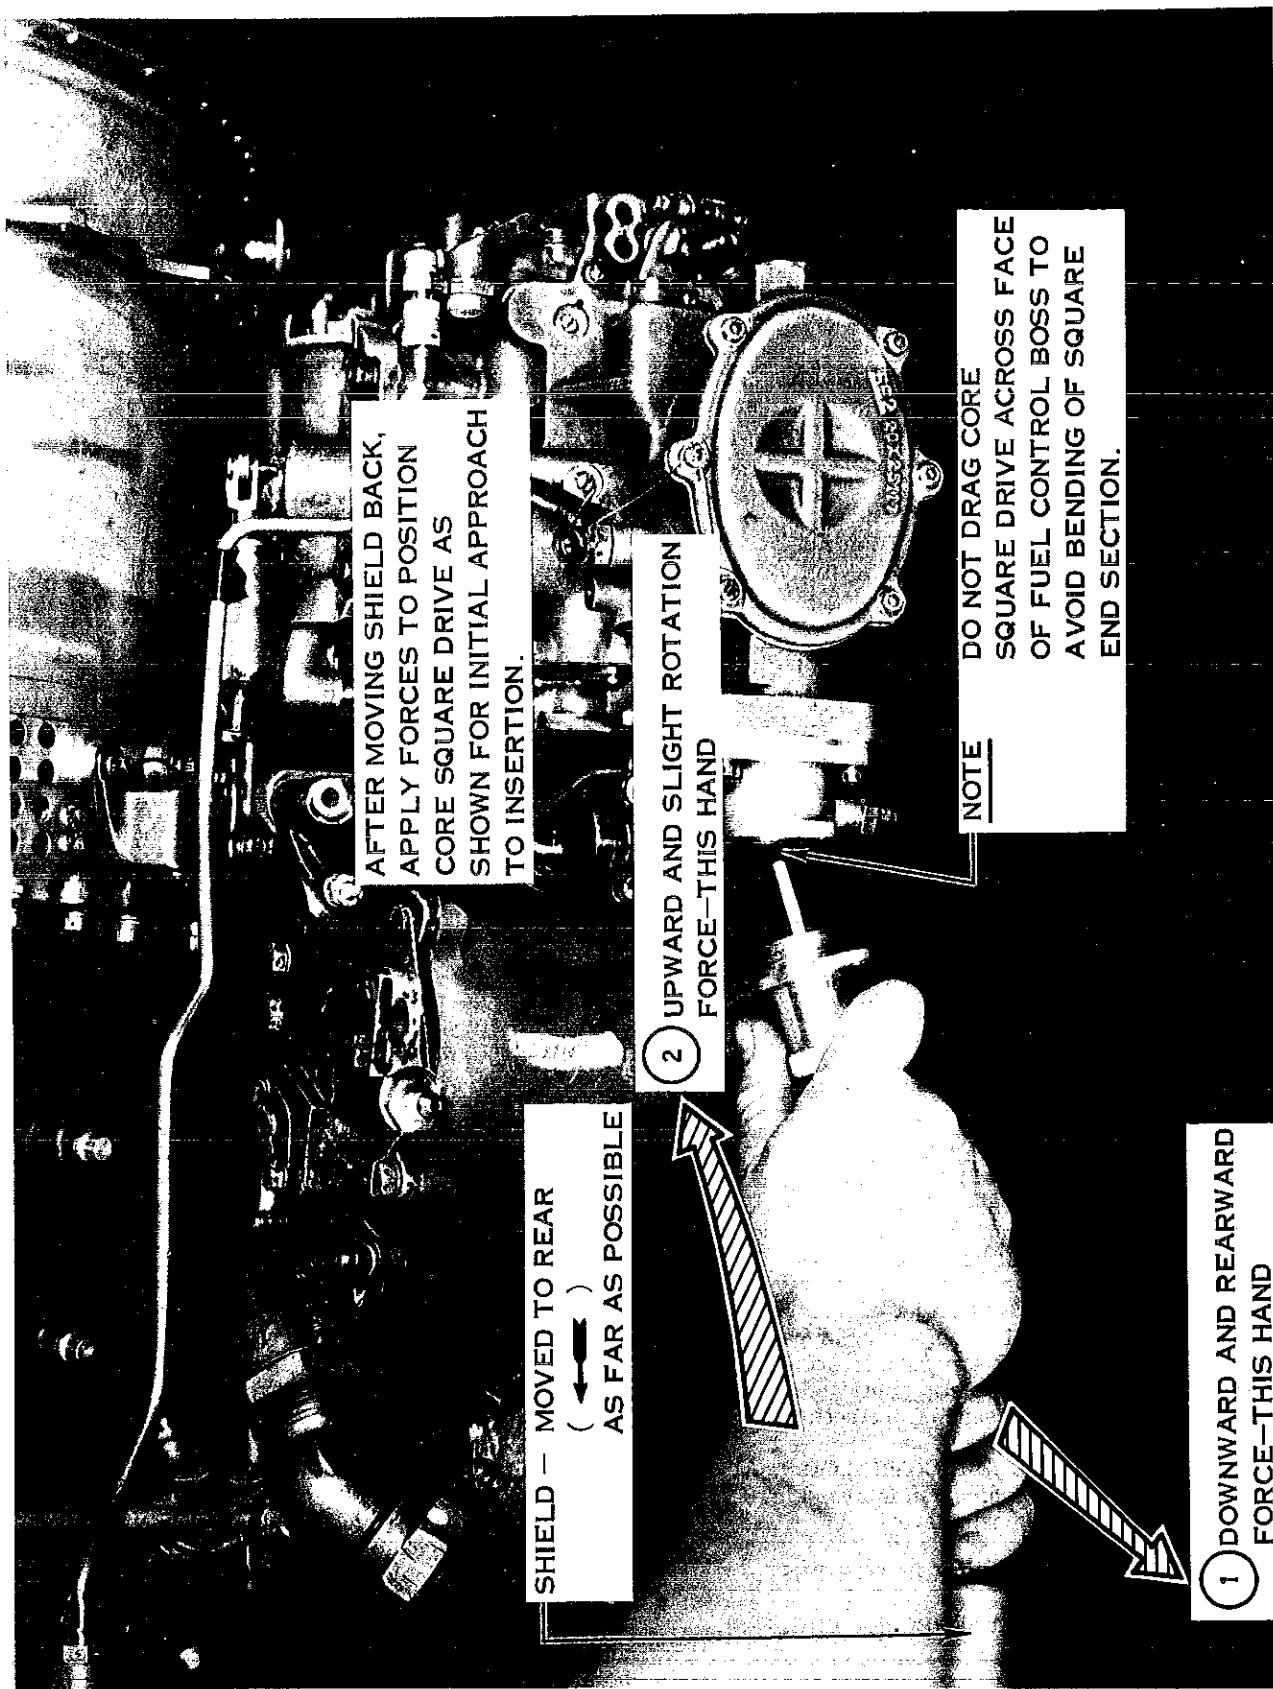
G-6. Flexible Shaft Assembly - Approach to Insertion into Fuel Control
